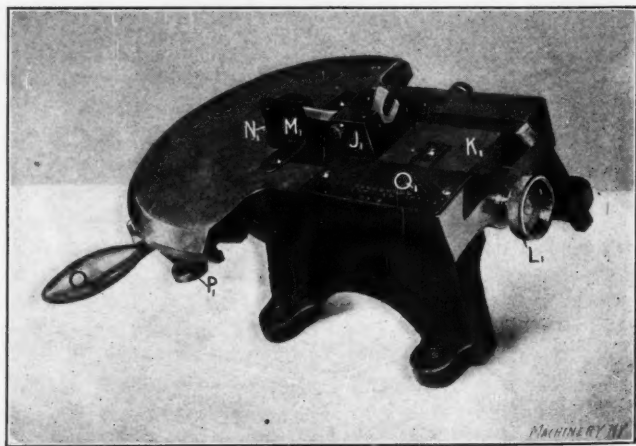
Adjustable Die for Making the First Bend in the Cam Lever
